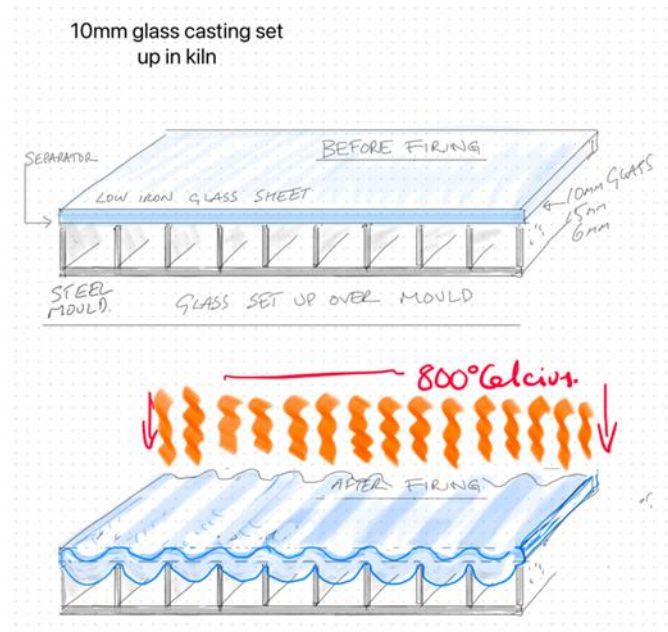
8 10mm Glass casting set up design, Mould diagram
